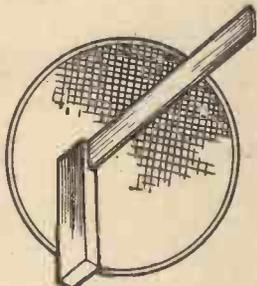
A steel set square. Adjustable universal squares and protractors are also available.
